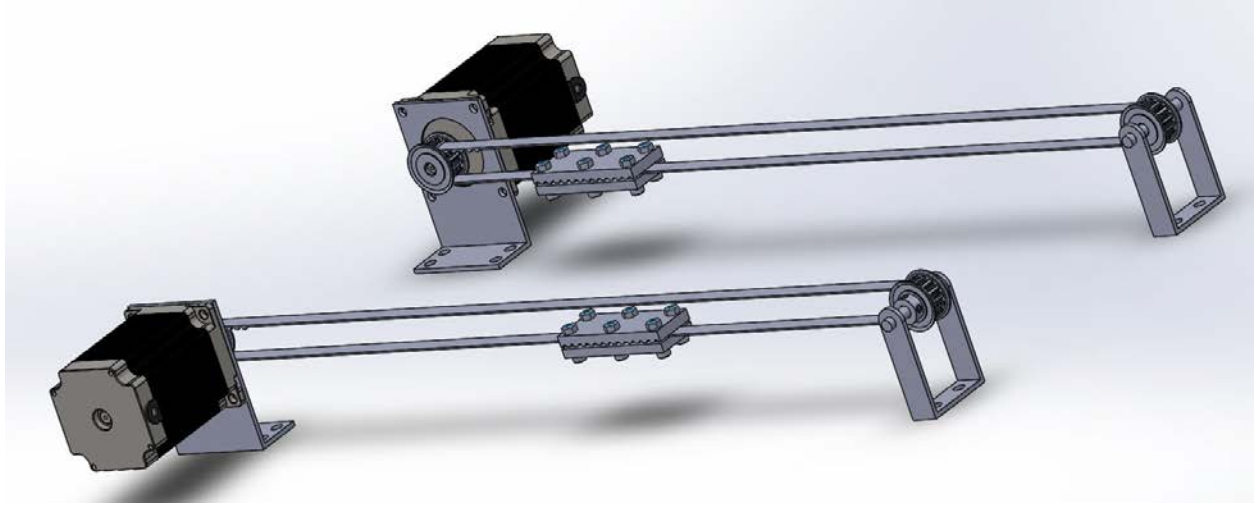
CAD model of the belt, pulley and mounts for motors and pulley
